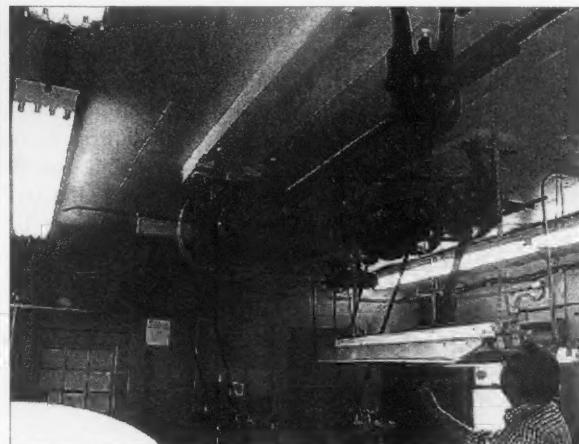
Photo M. The line-shaft used to distribute rotating mechanical power to various pieces of machine shop equipment.
